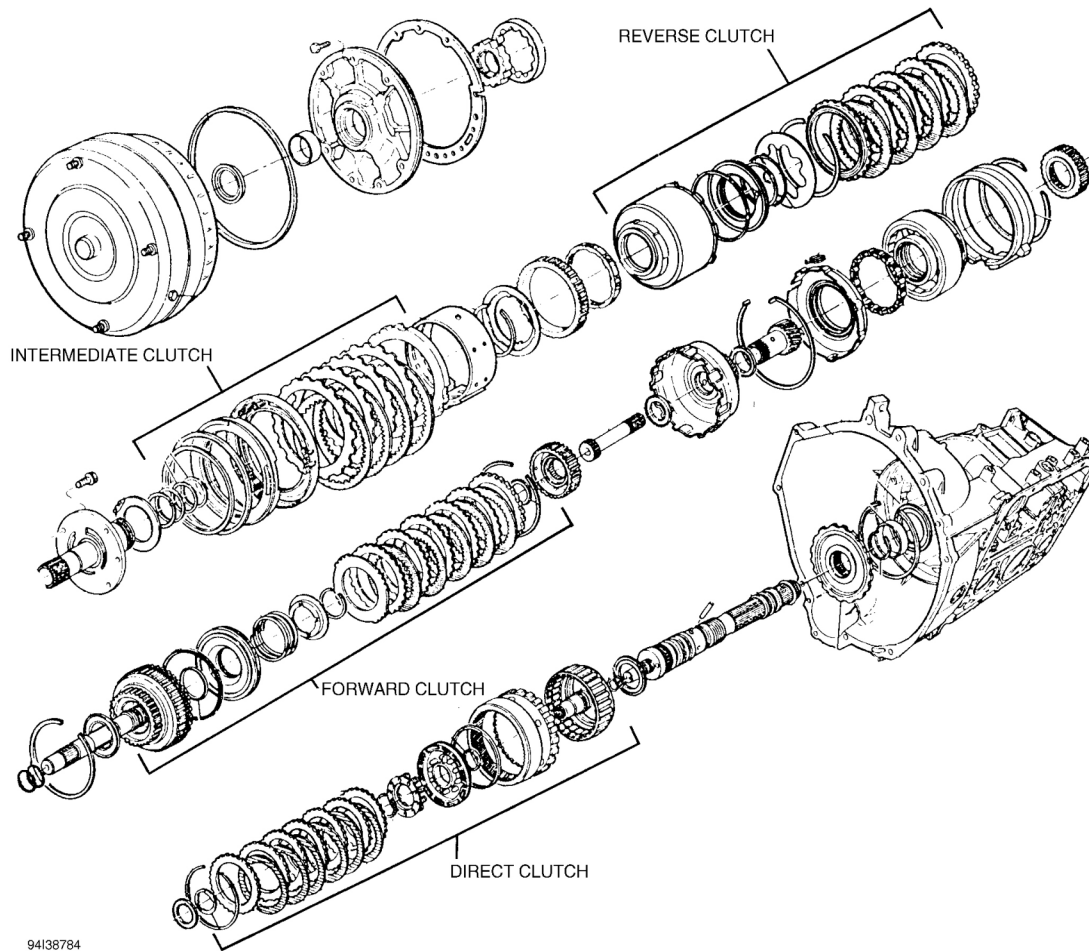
Exploded View Of AODE/AODE-W Transmission
